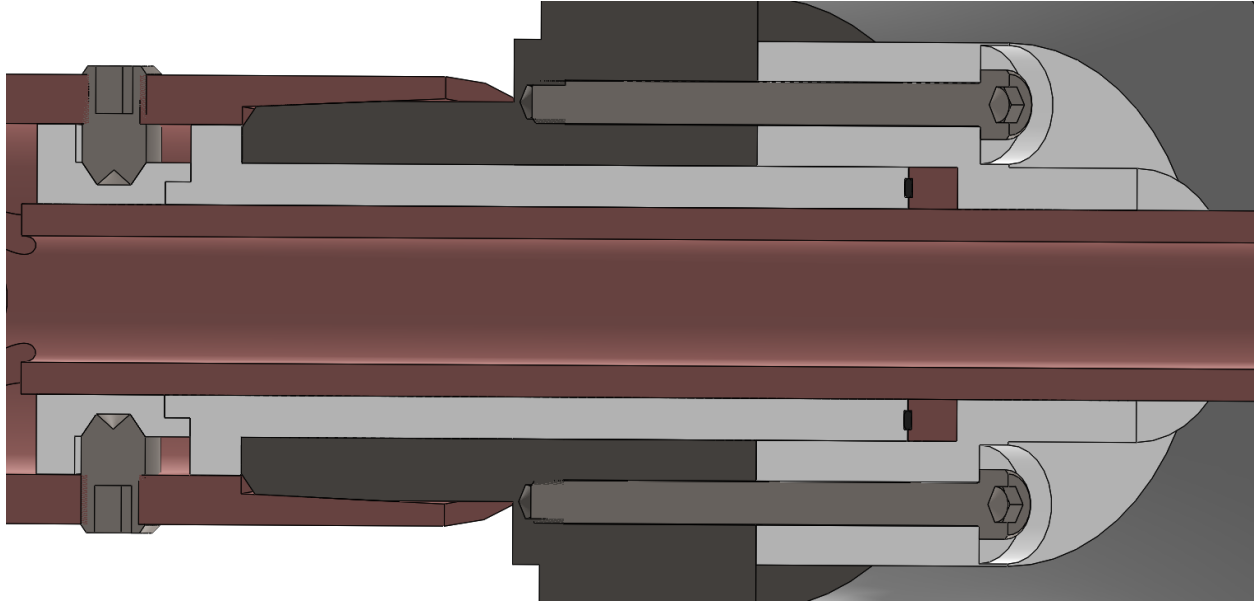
Cutaway view of the coaxial gun focusing on the triple seal location.
